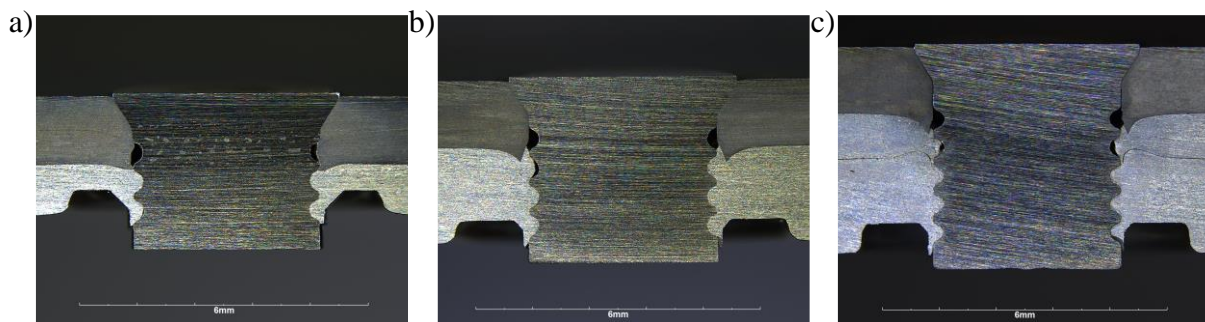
Cross section of a joint of 1.4mm DP600GA – 1mm AA6061 (a); 1.4mm DP600GA – 2mm AA6061 (b) and 1.4mm DP600GA – 1mm AA6061 – 2mm AA6061(c)
